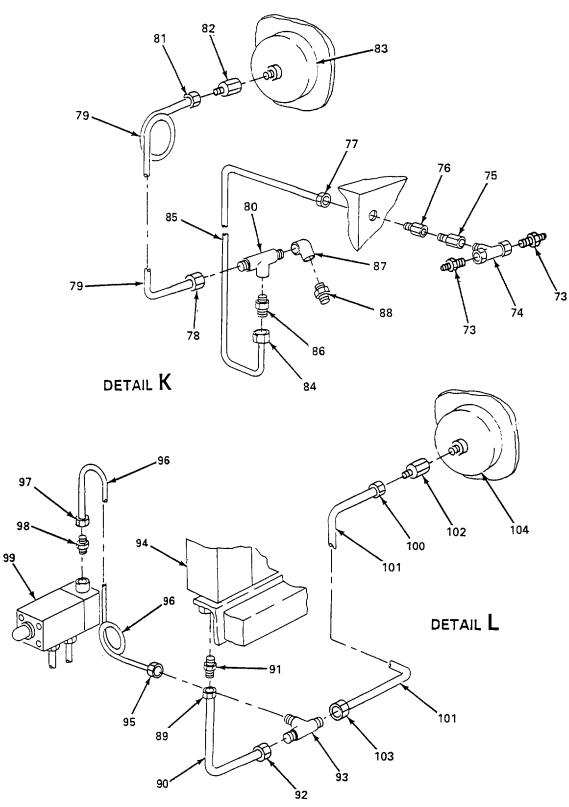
Lines and Fittings, Removal (Sheet 6 of 6).
